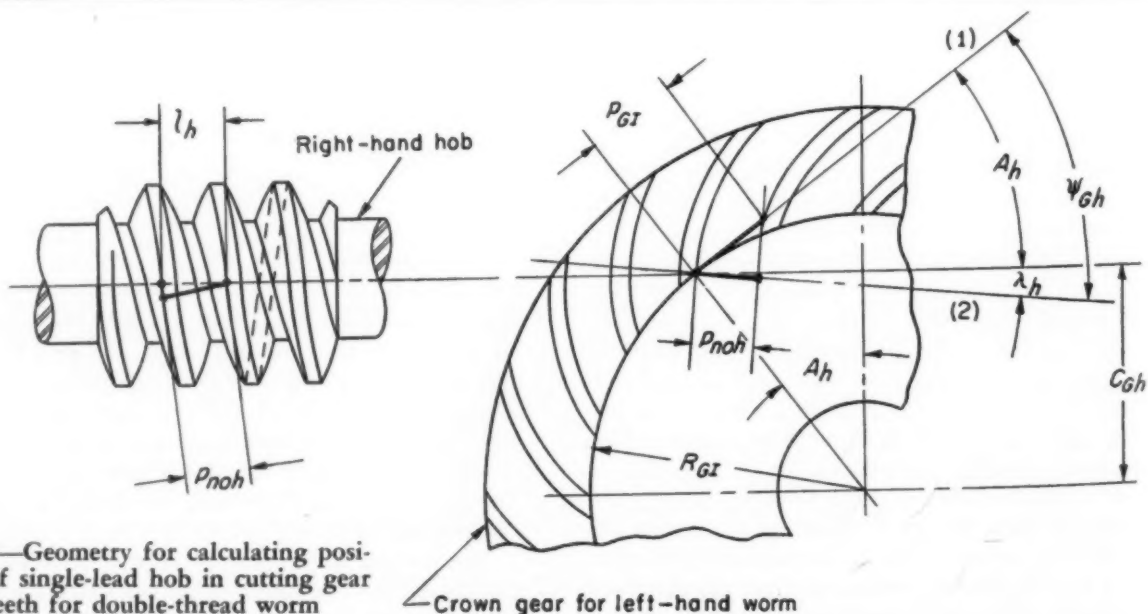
Geometry for calculating position of single-lead hob in cutting gear teeth for double-thread worm
